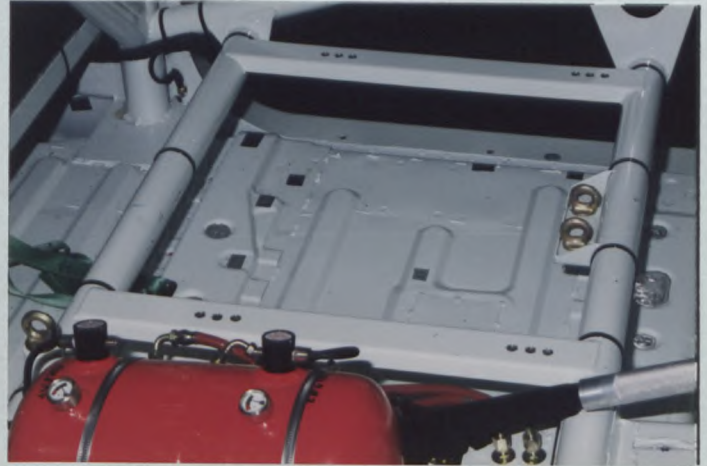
SEAT BRACKET AND LONGITUDINAL
